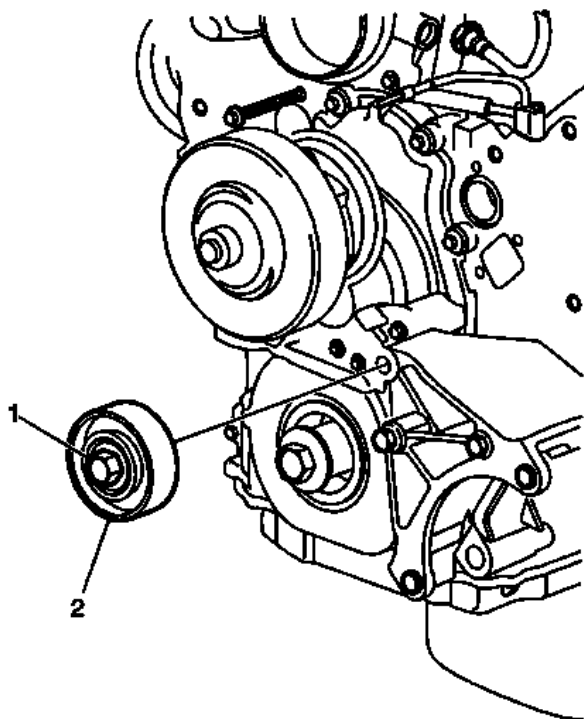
Drive Belt Idler Pulley & Fastener (L99 or LS3)
